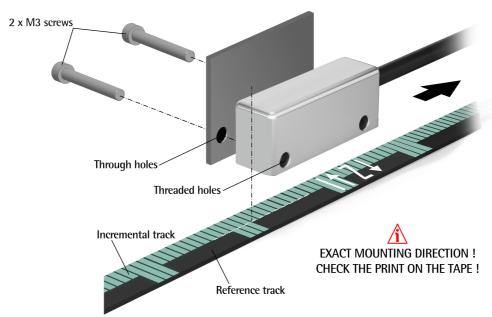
Mounting the sensor with 10 mm wide double track magnetic tape
